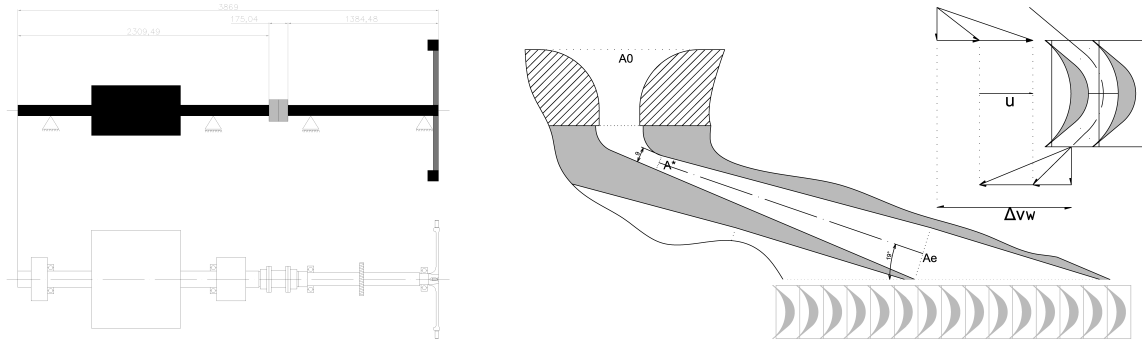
drive train with turbine and alternator arrangement Figure 4: turbine nozzle and blade geometry as wrapped section
